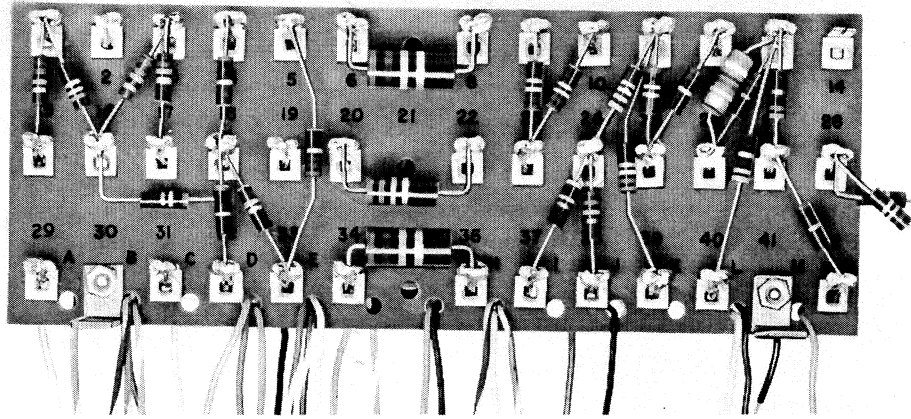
THE COMPLETED PARTS BOARD, WITH THE RESISTORS AND ONE CONDENSER CONNECTED. COMPARE THIS PHOTO WITH FIG. 6 ON THE SHEET OF DIAGRAMS
